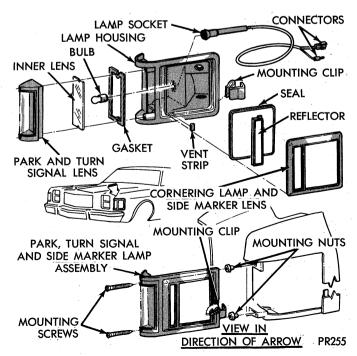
Front Park, Turn Signal, Cornering, and Side Marker Lamp—Carline S
